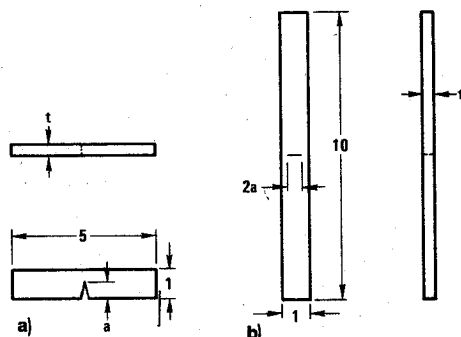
Test specimen dimensions. All dimensions in inches. a) three-point bend specimen; b) center-notched specimen.
